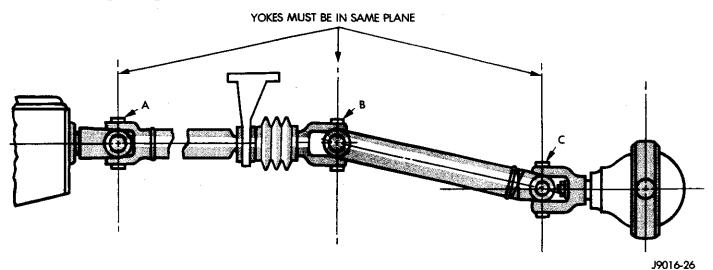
Vertical Angle Measurement-Two-Piece Drive Shaft
